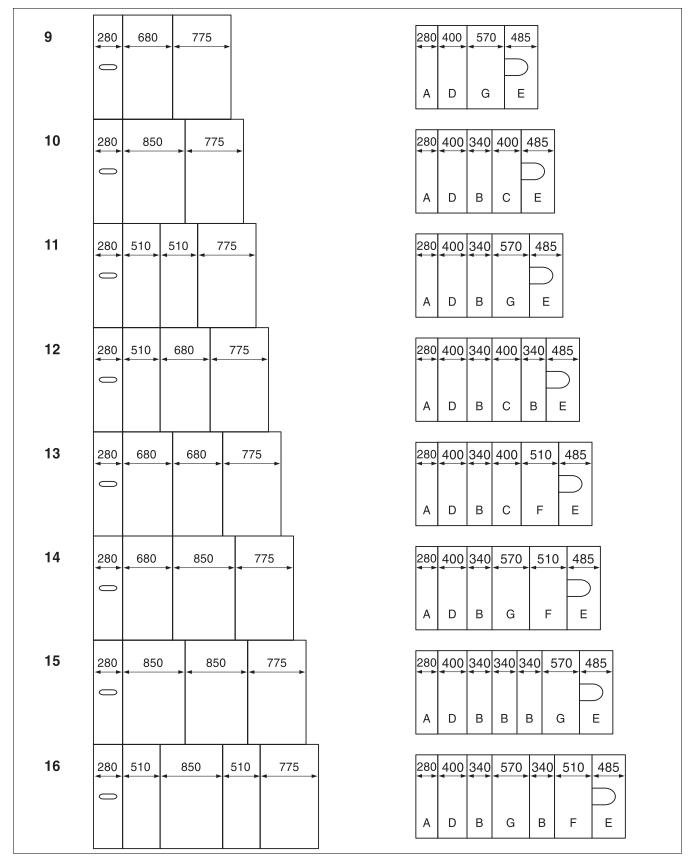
Arrangement of side panels (left) and hoods (right) for the various boiler sizes (dimensions in mm)
